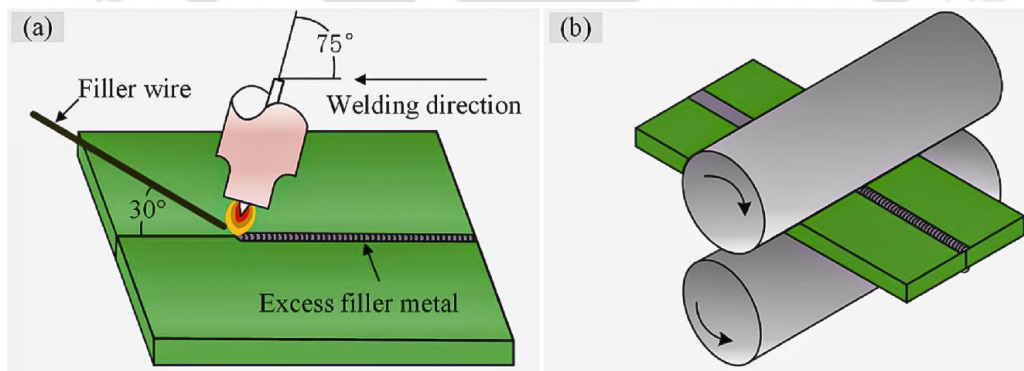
Schematic diagram (a) welding process; (b) rolling process (Z. Wang et al., 2023)
